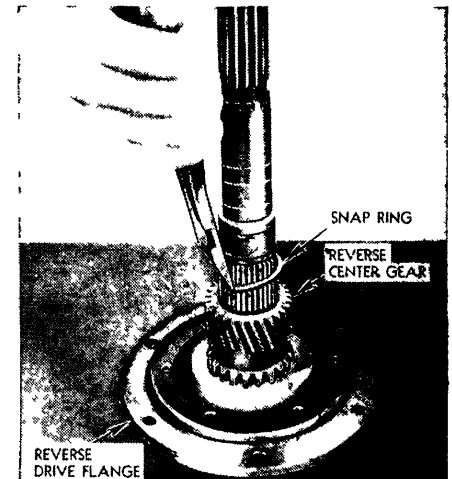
Install reverse center gear snap ring (this ring is slightly larger than other snap rings used in transmission). Install reverse planet carrier over output shaft with bronze oil pump driver gear down, meshing pinions with reverse center gear. Assemble reverse internal gear on gear support and install large snap ring
